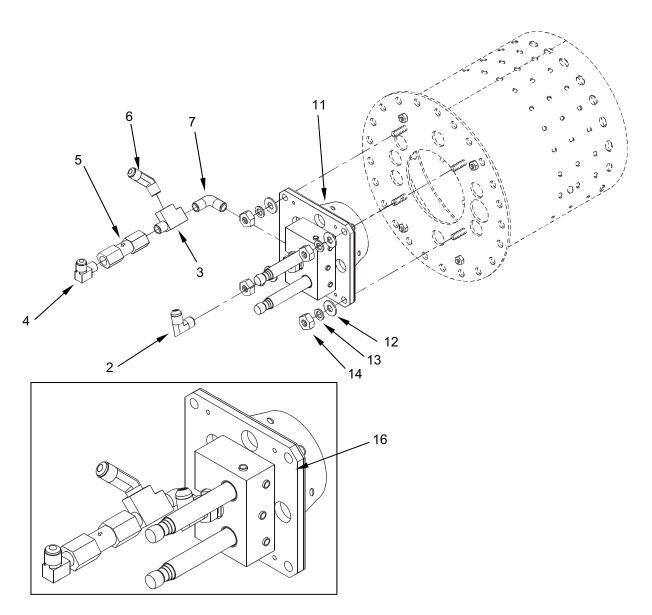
Assembly, Burner Nozzle (Sheet 1 of 2).
